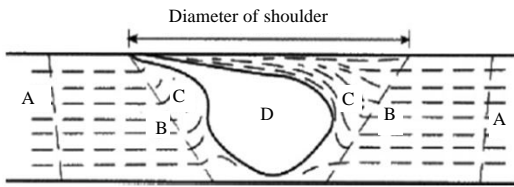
Schematic cross-section a typical FSW weld: a) Metal base; b) Heat affected zone; c) Thermomechanical affected zone and d) Nugget zone (Nandan *et al.*, 2008)
